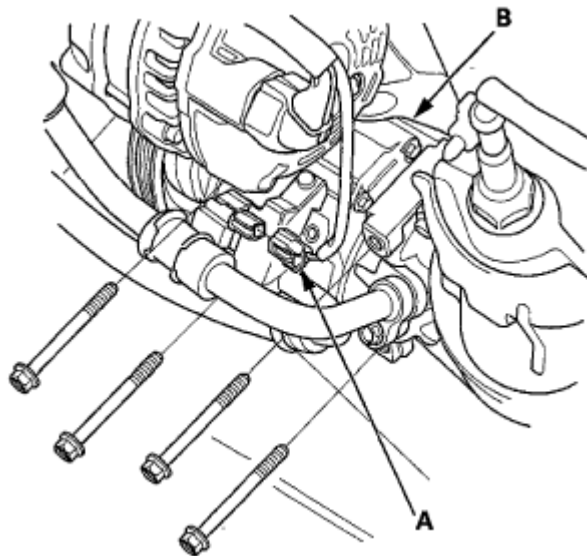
Identifying A/C Compressor Clutch Connector And A/C Compressor
